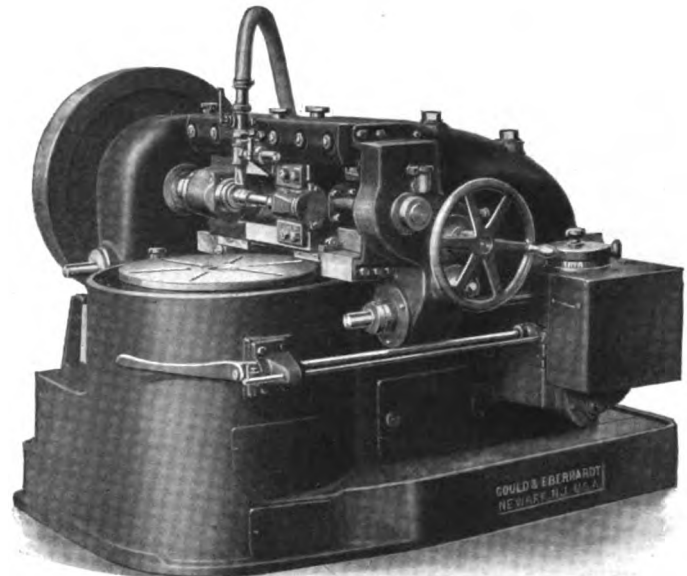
No. 18 W—Worm Wheel Generating Machine
